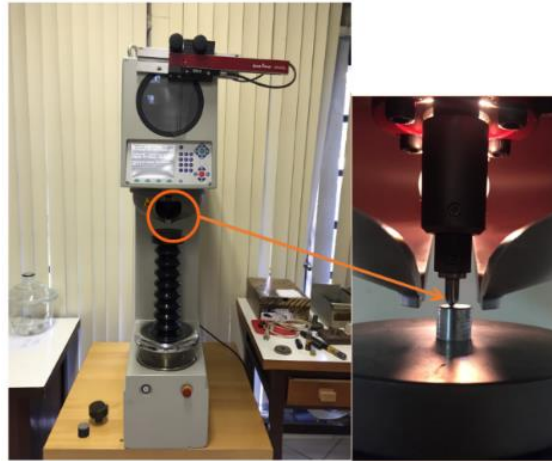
Zwick/Roell ZHU250 Universal Hardness Machine.
